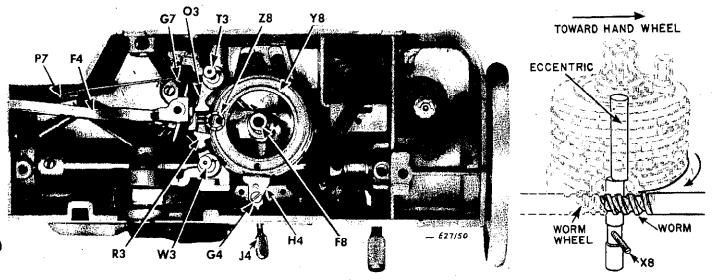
Showing Location of Ball Pivot on Driving Arm
